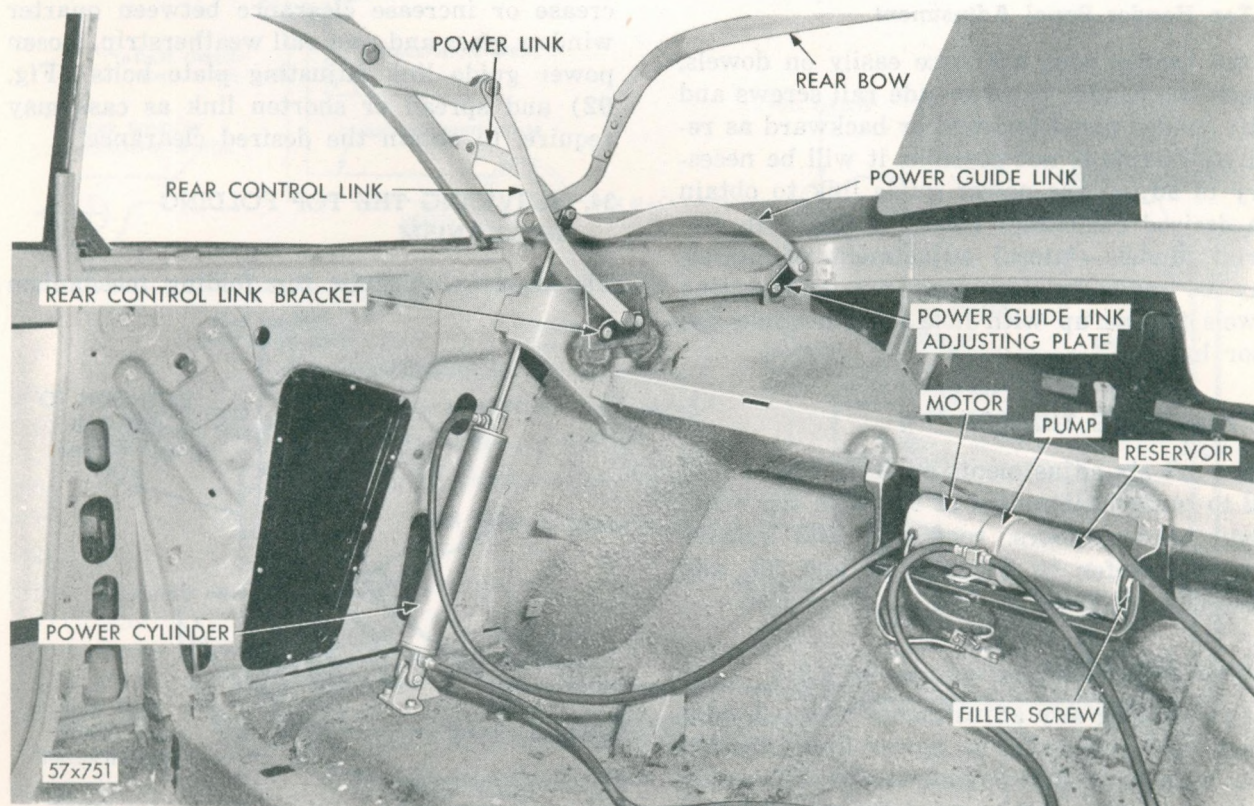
Convertible Top Hydraulic Folding Mechanism
